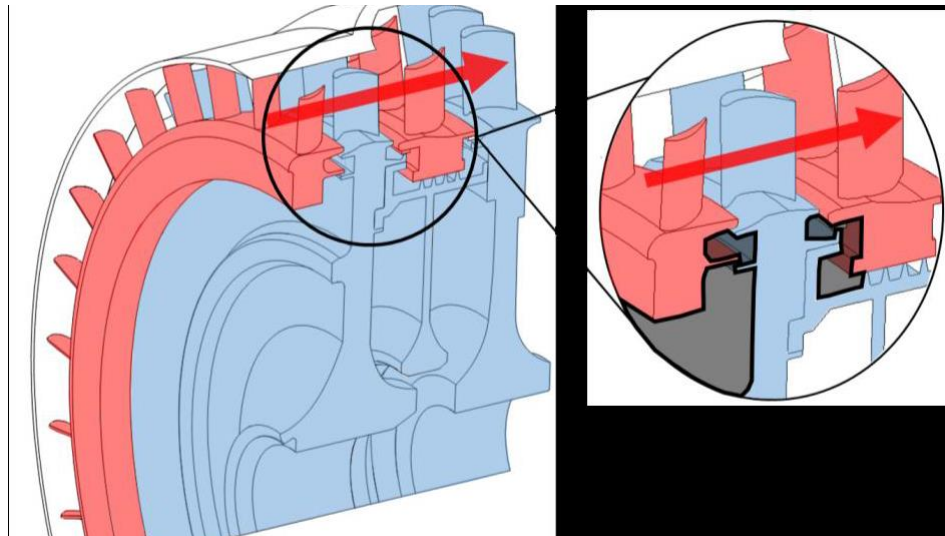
Rotating parts (in blue highlight) including rotor seal, and stationary parts (in red highlight) in a gas turbine stage [80]
